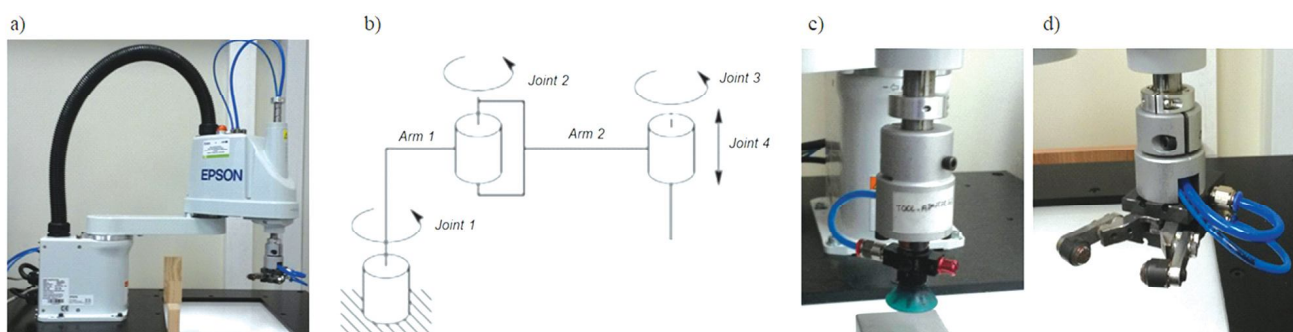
Epson LS3-401S: a) robot view, b) kinetic diagram, c) original tool – suction cut, d) replaced tool – gripper.
